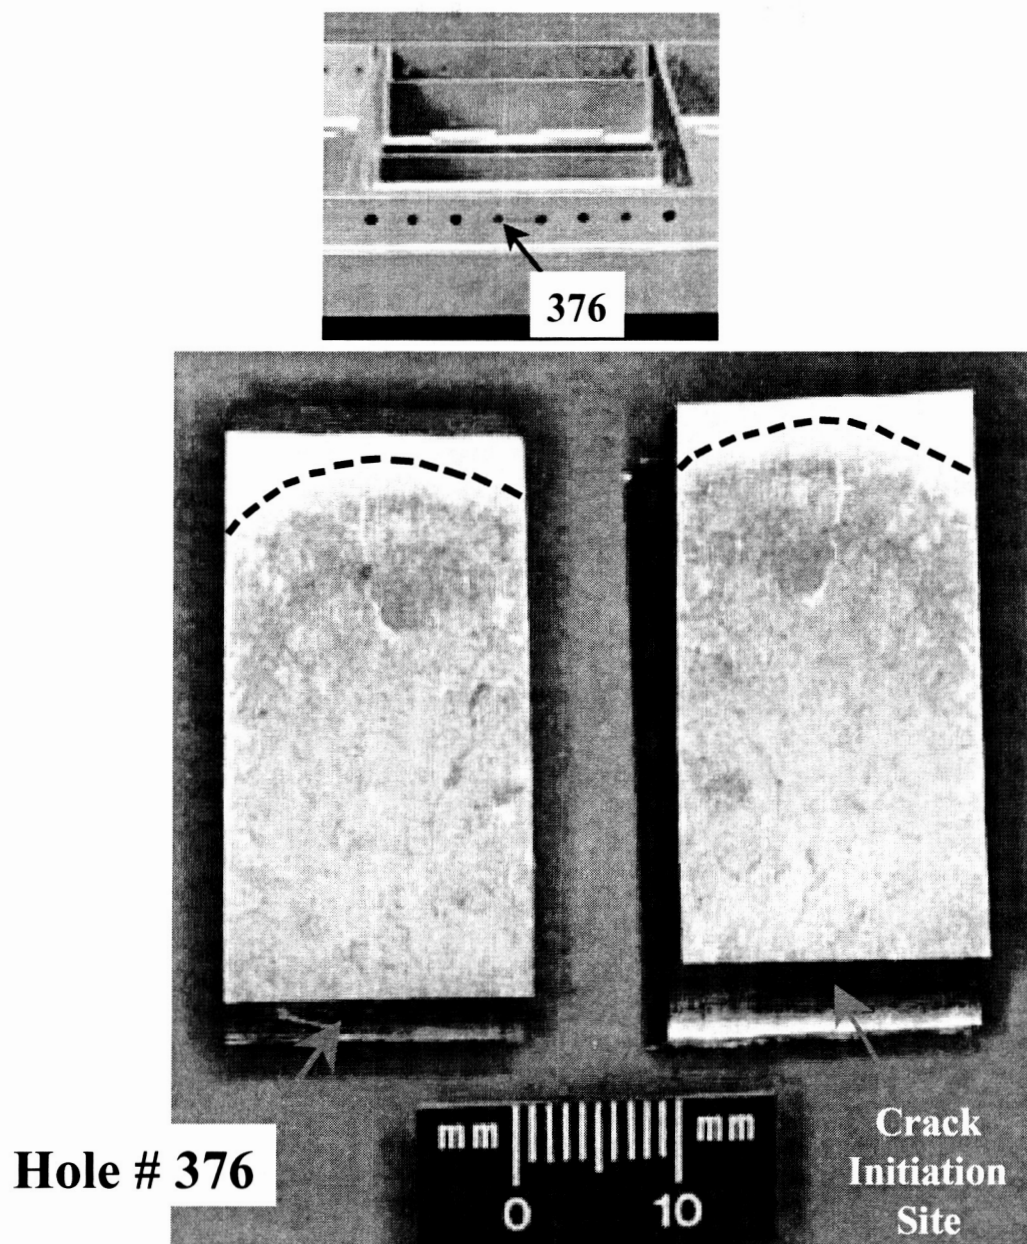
The photograph shows both surfaces of the crack emanating from fastener hole #376. The location of fastener hole #376 is shown in the small photograph.
